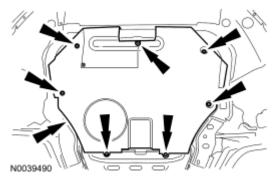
Locating Splash Shield Bolts Courtesy of FORD MOTOR CO.
